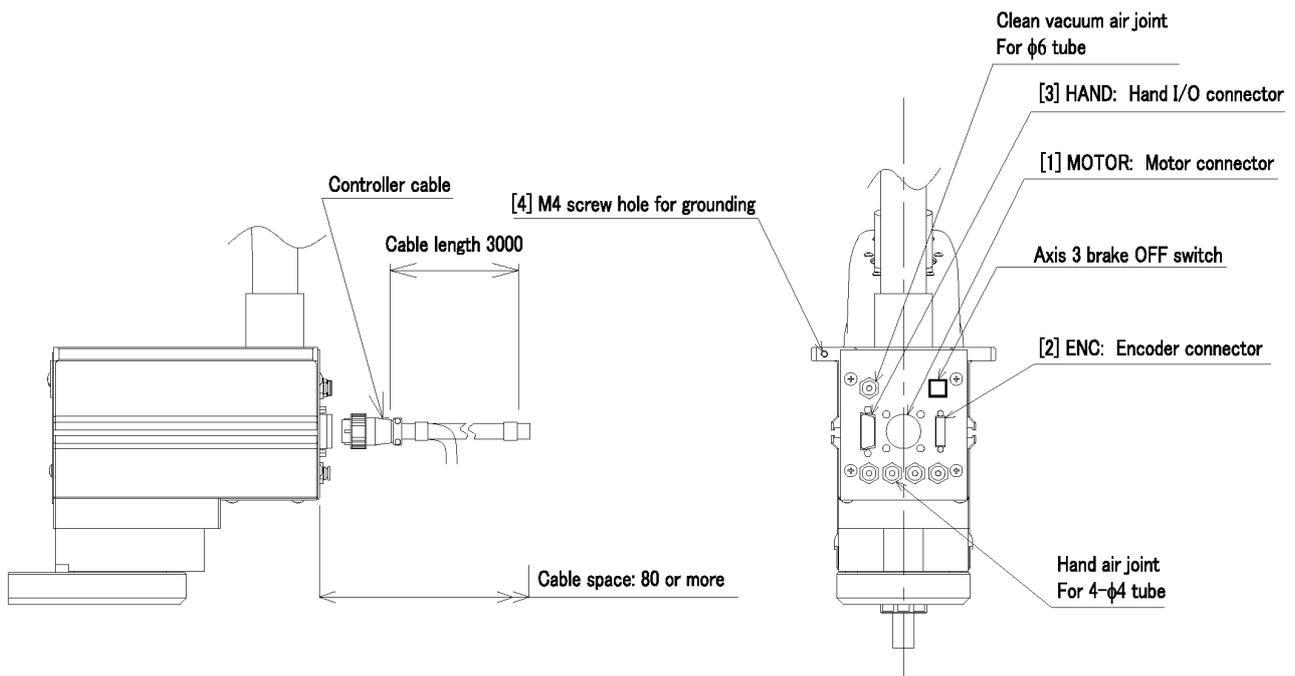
Robot side connector layout drawing (TH350A-T)
